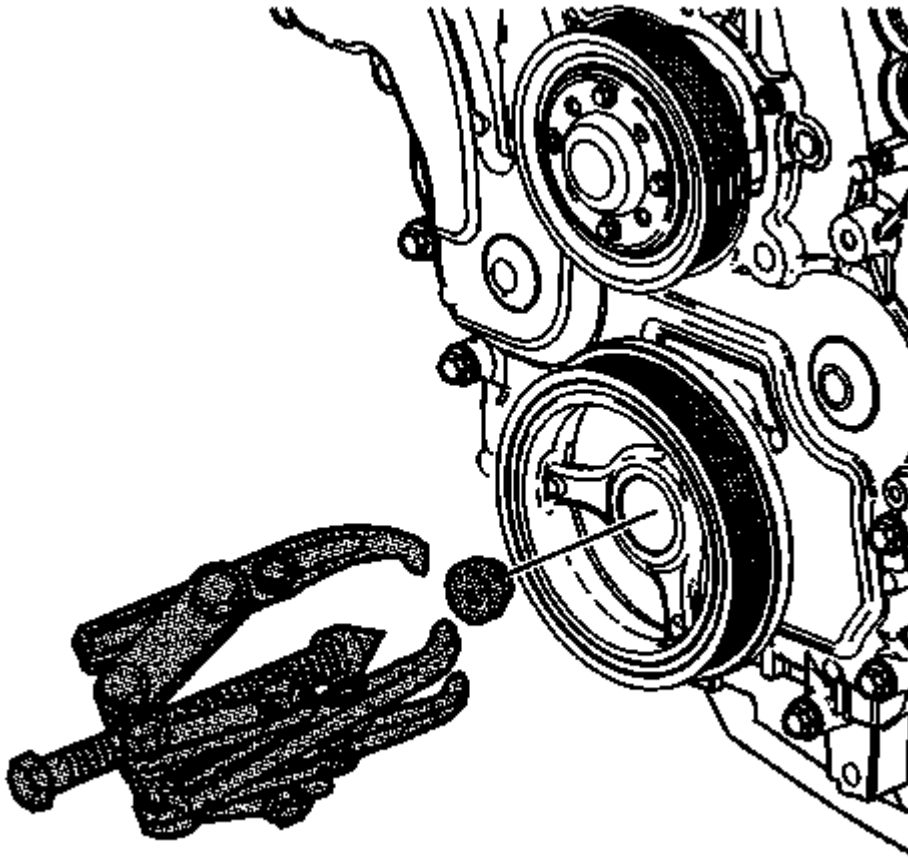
View Of Crankshaft Balancer Remover Tool In Nose Of Crankshaft
